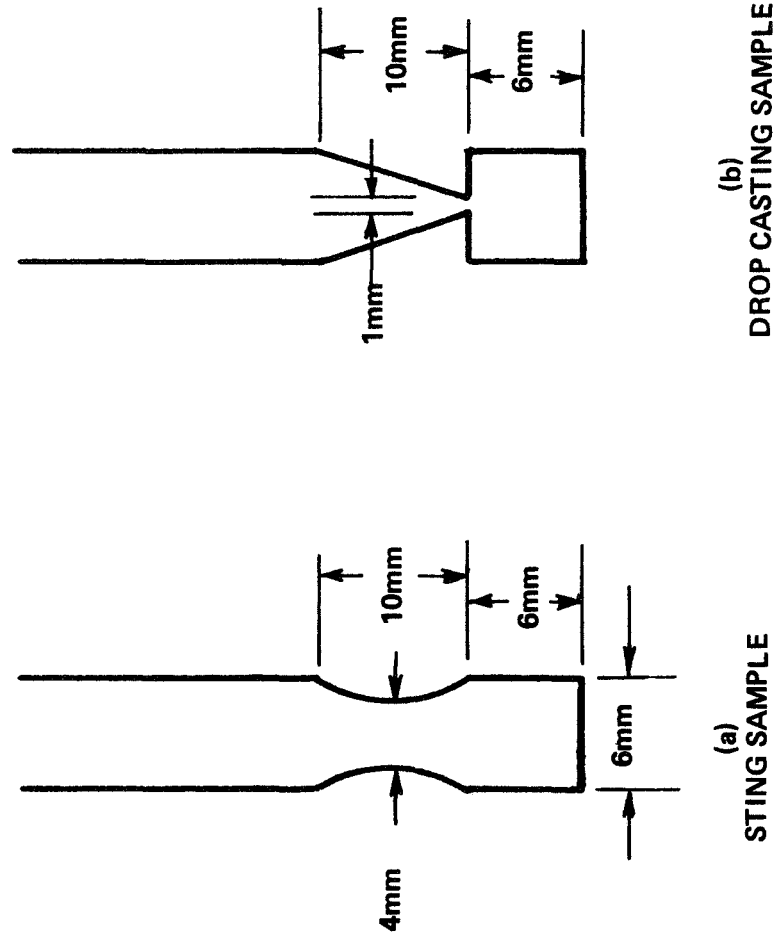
STING AND DROP CASTING SAMPLE CONFIGURATIONS
